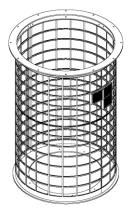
Derrick Stainless Steel Cage (J. Colgrove)
